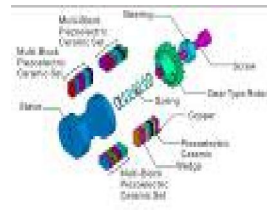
The exploded view of the piezoelectric motor of high actuating force.
